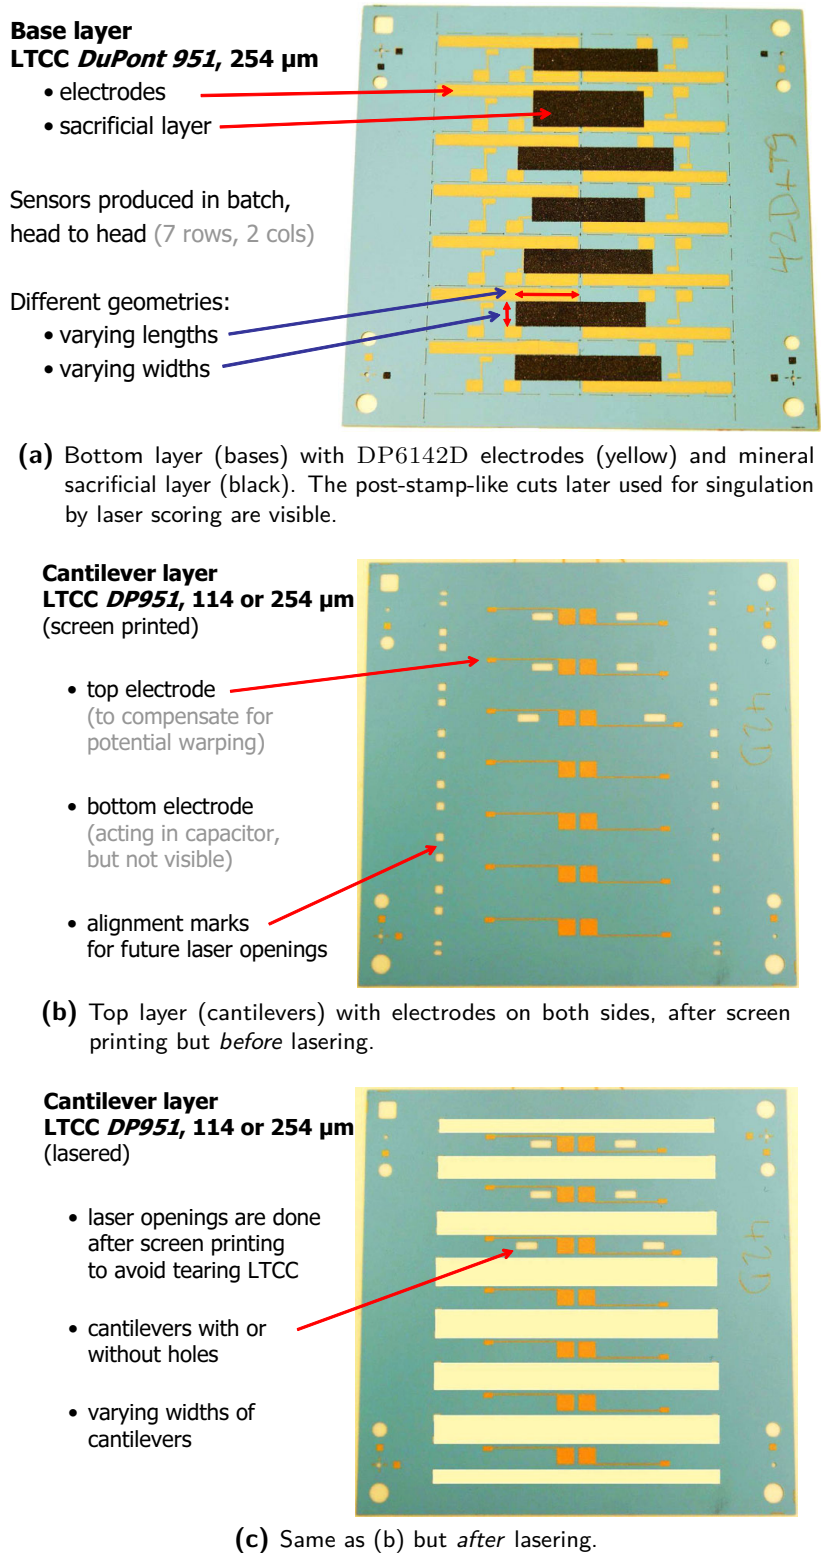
Unassembled LTCC circuit of variant V5 with base (a) and cantilever layers (c), containing 2×7 sensors mounted head-to-head. The intermediate manufacturing step of the cantilevers layer is represented on (b). The tape dimensions are 72×72 mm.
